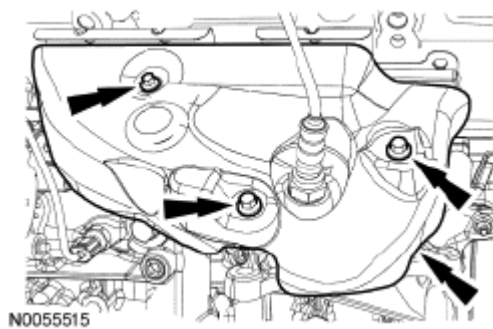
Locating LH Exhaust Manifold Heat Shield Bolts
